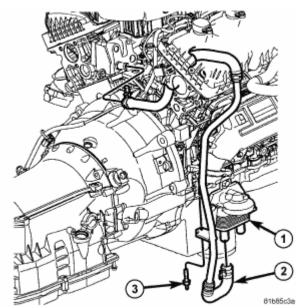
Removing/Installing Oil Cooler & Coolant Hoses Courtesy of CHRYSLER LLC
